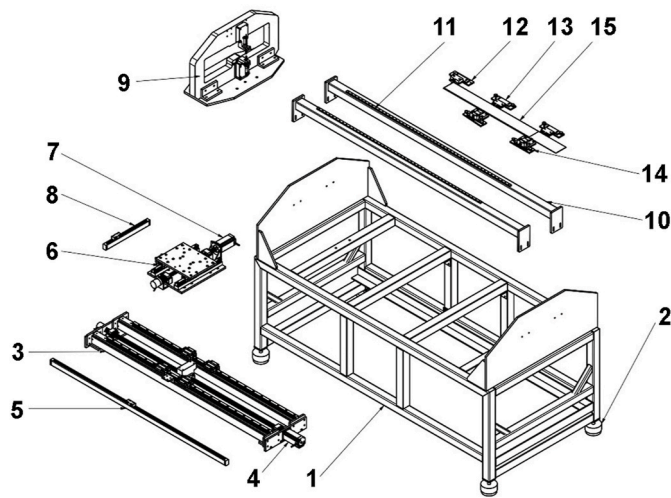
Exploded view of the subassemblies and components of the equipment.
